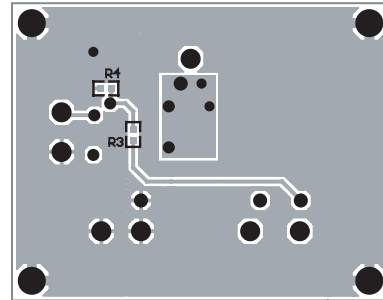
AAT1154 Evaluation Board PCB Bottom Side.
